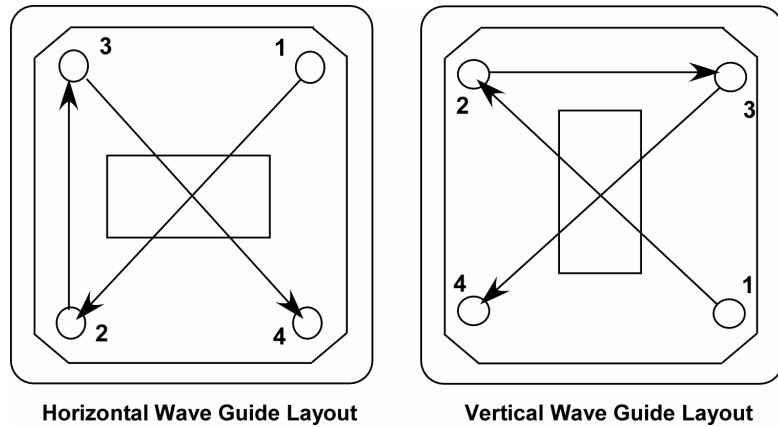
, Typical 4 Screw Mounting Flange Tightening Sequence
